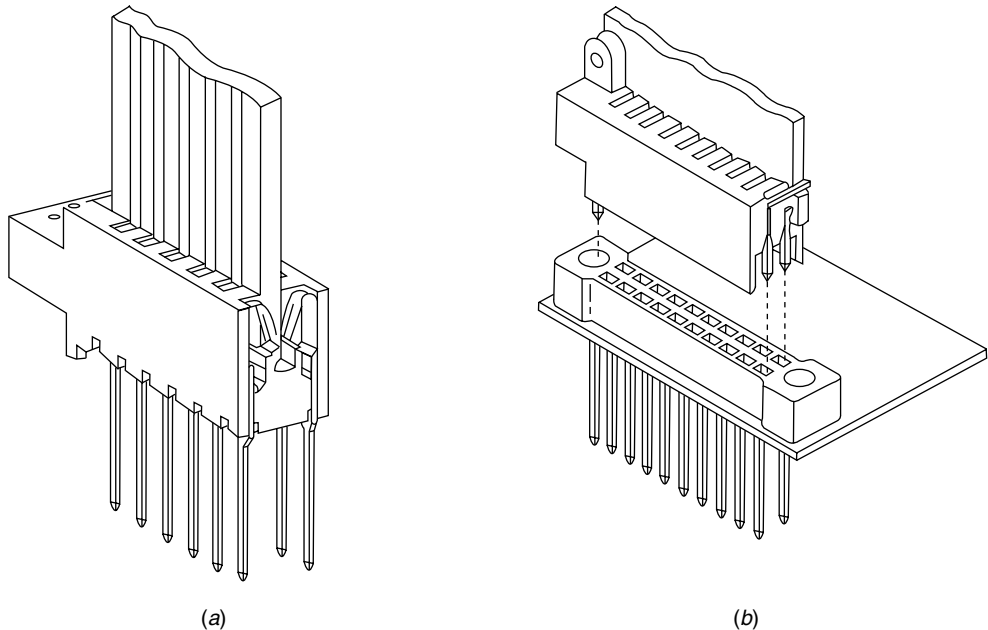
Printed circuit board connectors: (a) card edge (one piece) and (b) two piece.
